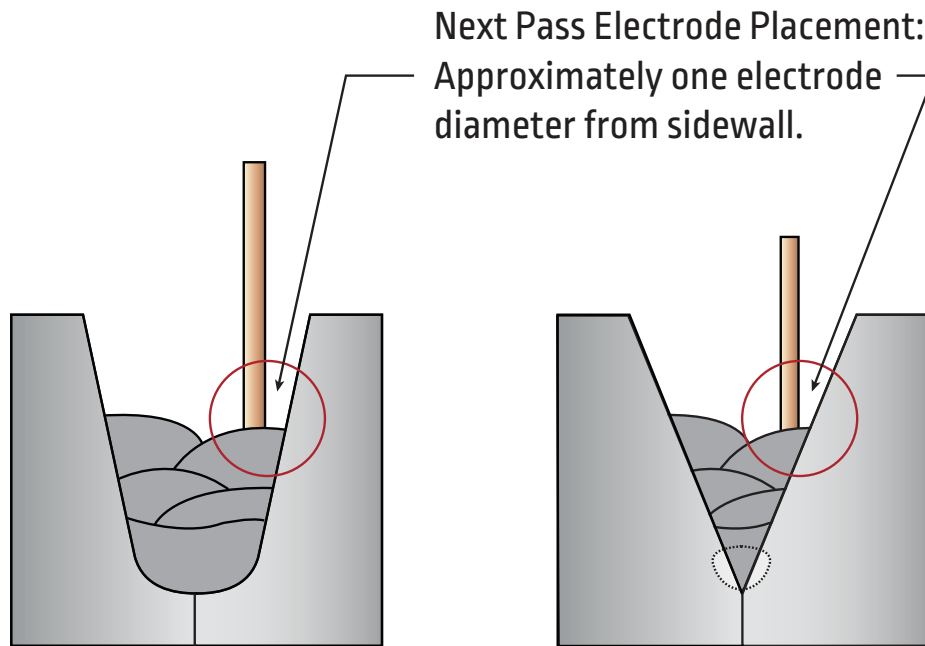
Proper Electrode Placement in a Single U-groove and Single V-groove Butt Joint.
